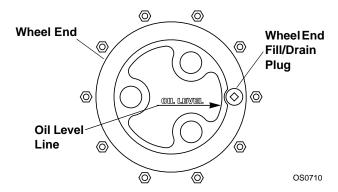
Wheel-end oil should be even with the bottom edge of the fill/drain plug hole.
